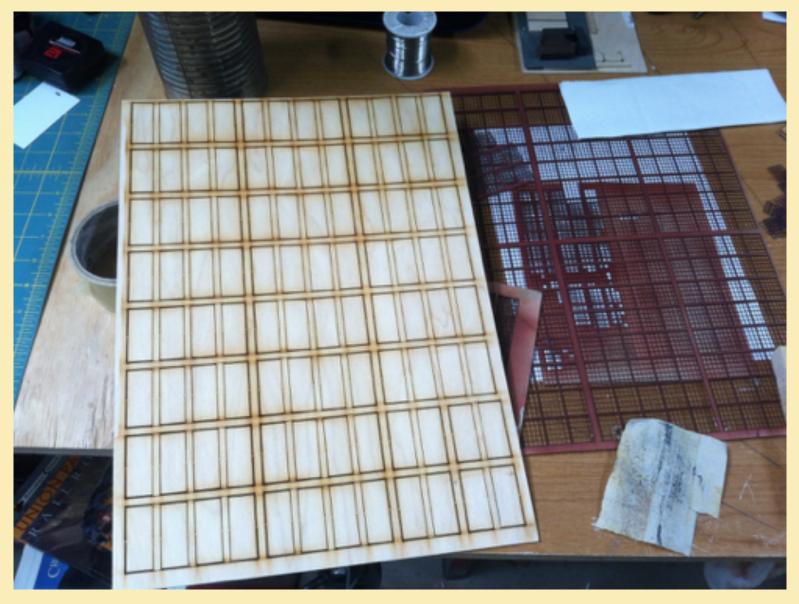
Window frames of 1/8" plywood, 2-12x24 sheets. Windows of 1/16."
